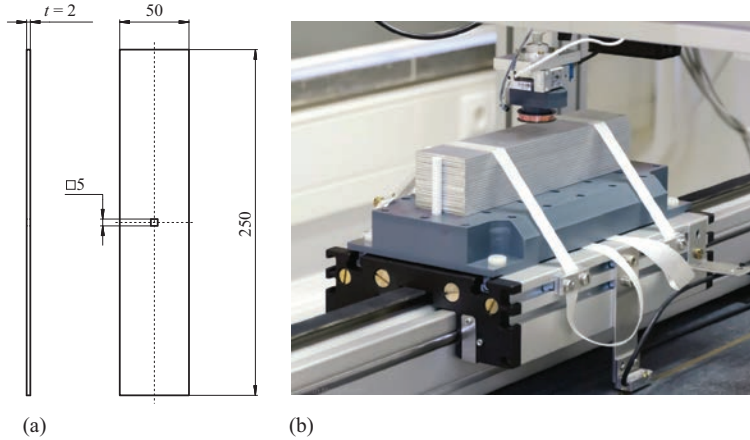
Technical drawing of defected sheet (a) and fully assembled UUT (b). The UUT consists of 22 defect-free aluminum sheets and 2 defected sheets of the same material in the second and third layers from top. The resulting defect is $5 \text{ mm} \times 5 \text{ mm} \times 4 \text{ mm}$ at depth $d = 2 \text{ mm}$
